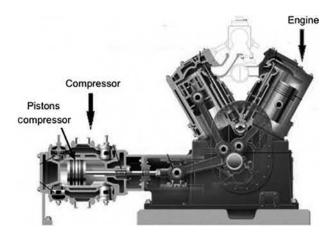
Cutaway of an integral engine reciprocating compressor.
